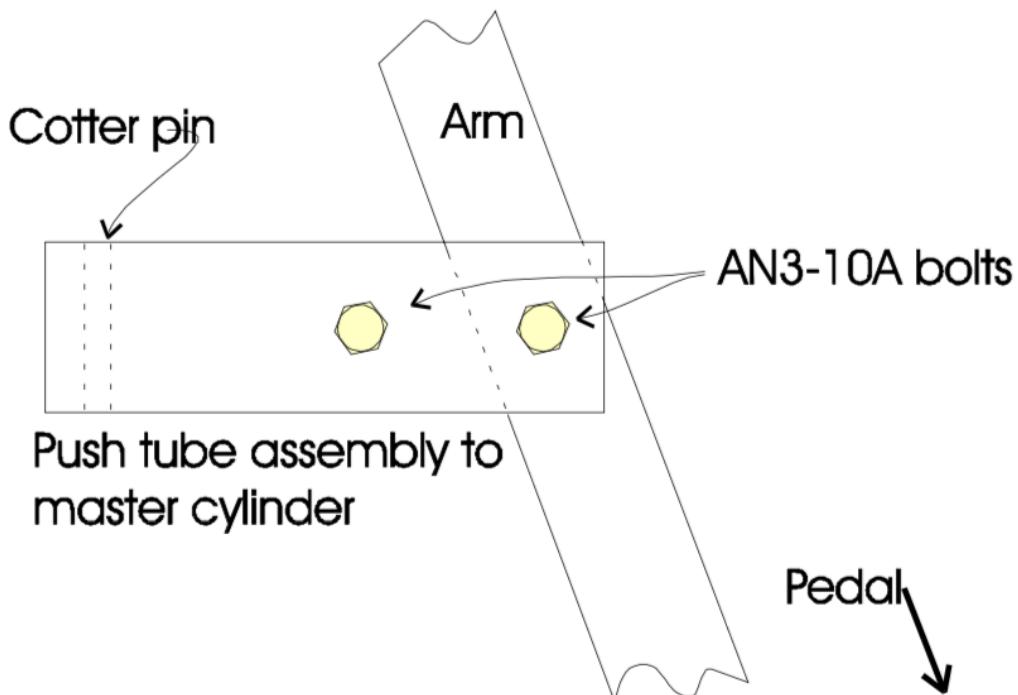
Brake Push Tube to Pedal Arm Attachment
